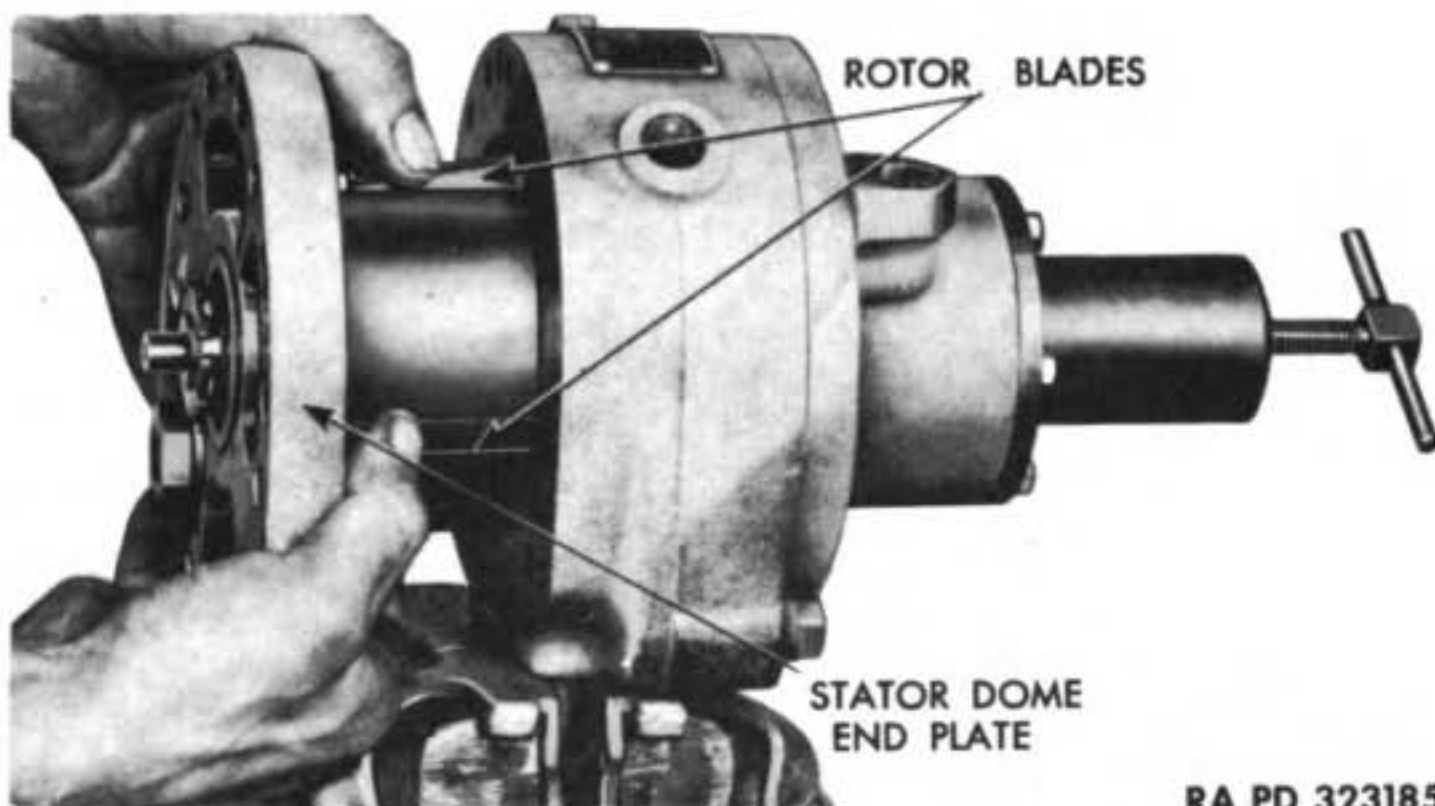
Locating End Plate Puller (41-P-2907-197) for Removing Stator Dome End Plate, Rotor, and Shaft Unit
